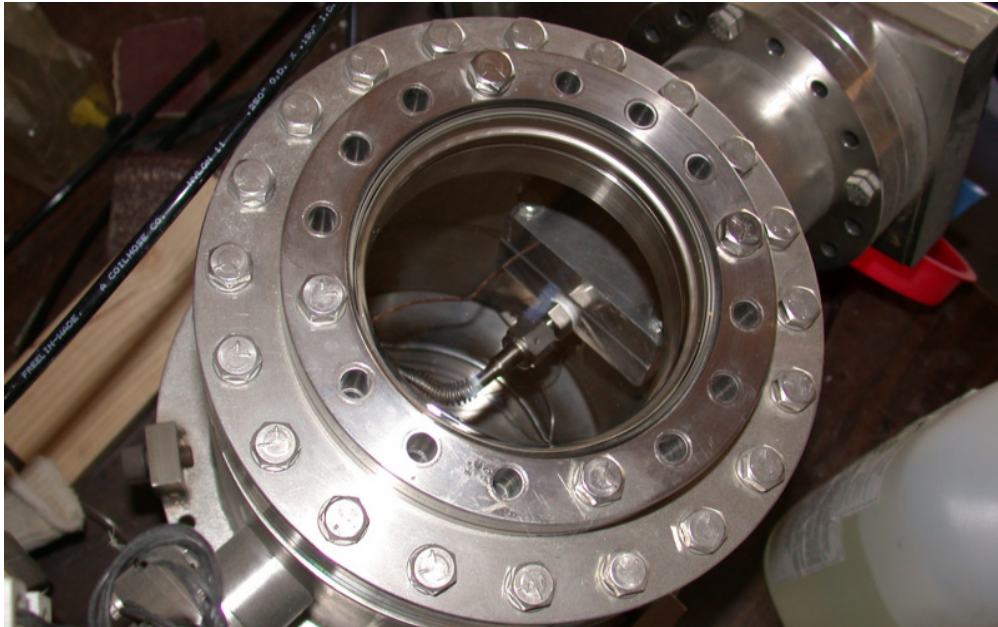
Looking through window at preform clamp fixture inside vacuum chamber
